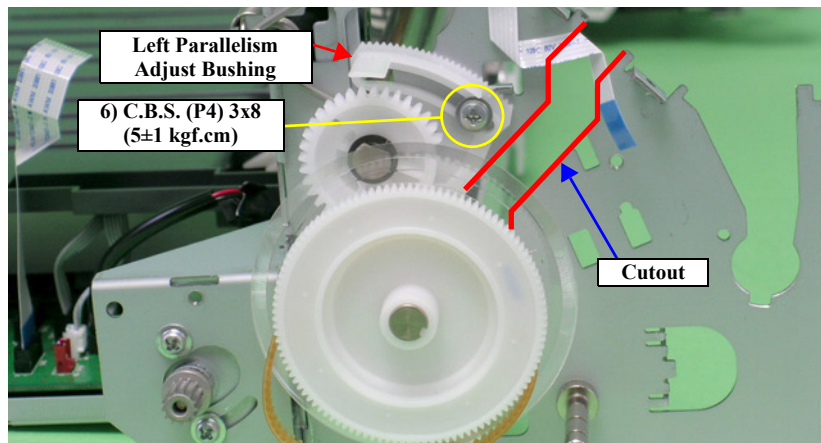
Rotating the Left Parallelism Adjust Bushing
